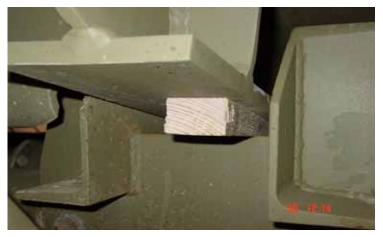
Wooden Wedge - Between Tank Saddle and Tank Mount Passenger Side
